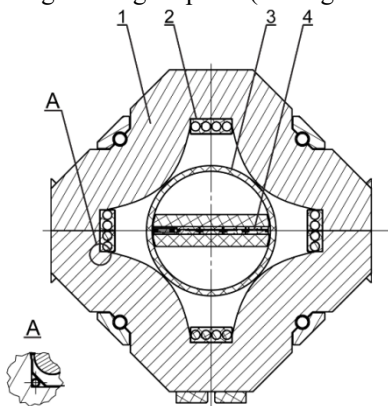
Cross-section of booster quadrupole magnet with measurements probe inside: 1 – iron yoke, 2 – coil, 3- probe coils rotating support, 4 – rotating coils.
